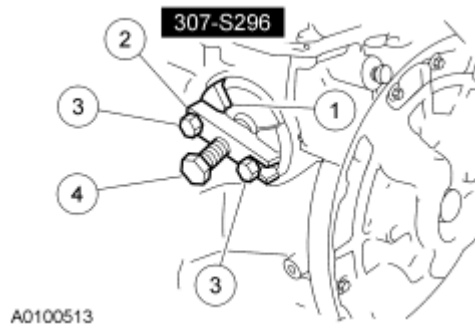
Assembling Special Tool Into Servo Cover Retaining Ring Groove
